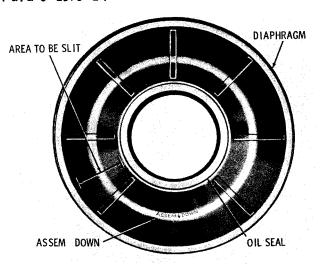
Diaphragm slit for removal from "dry" converter housing
